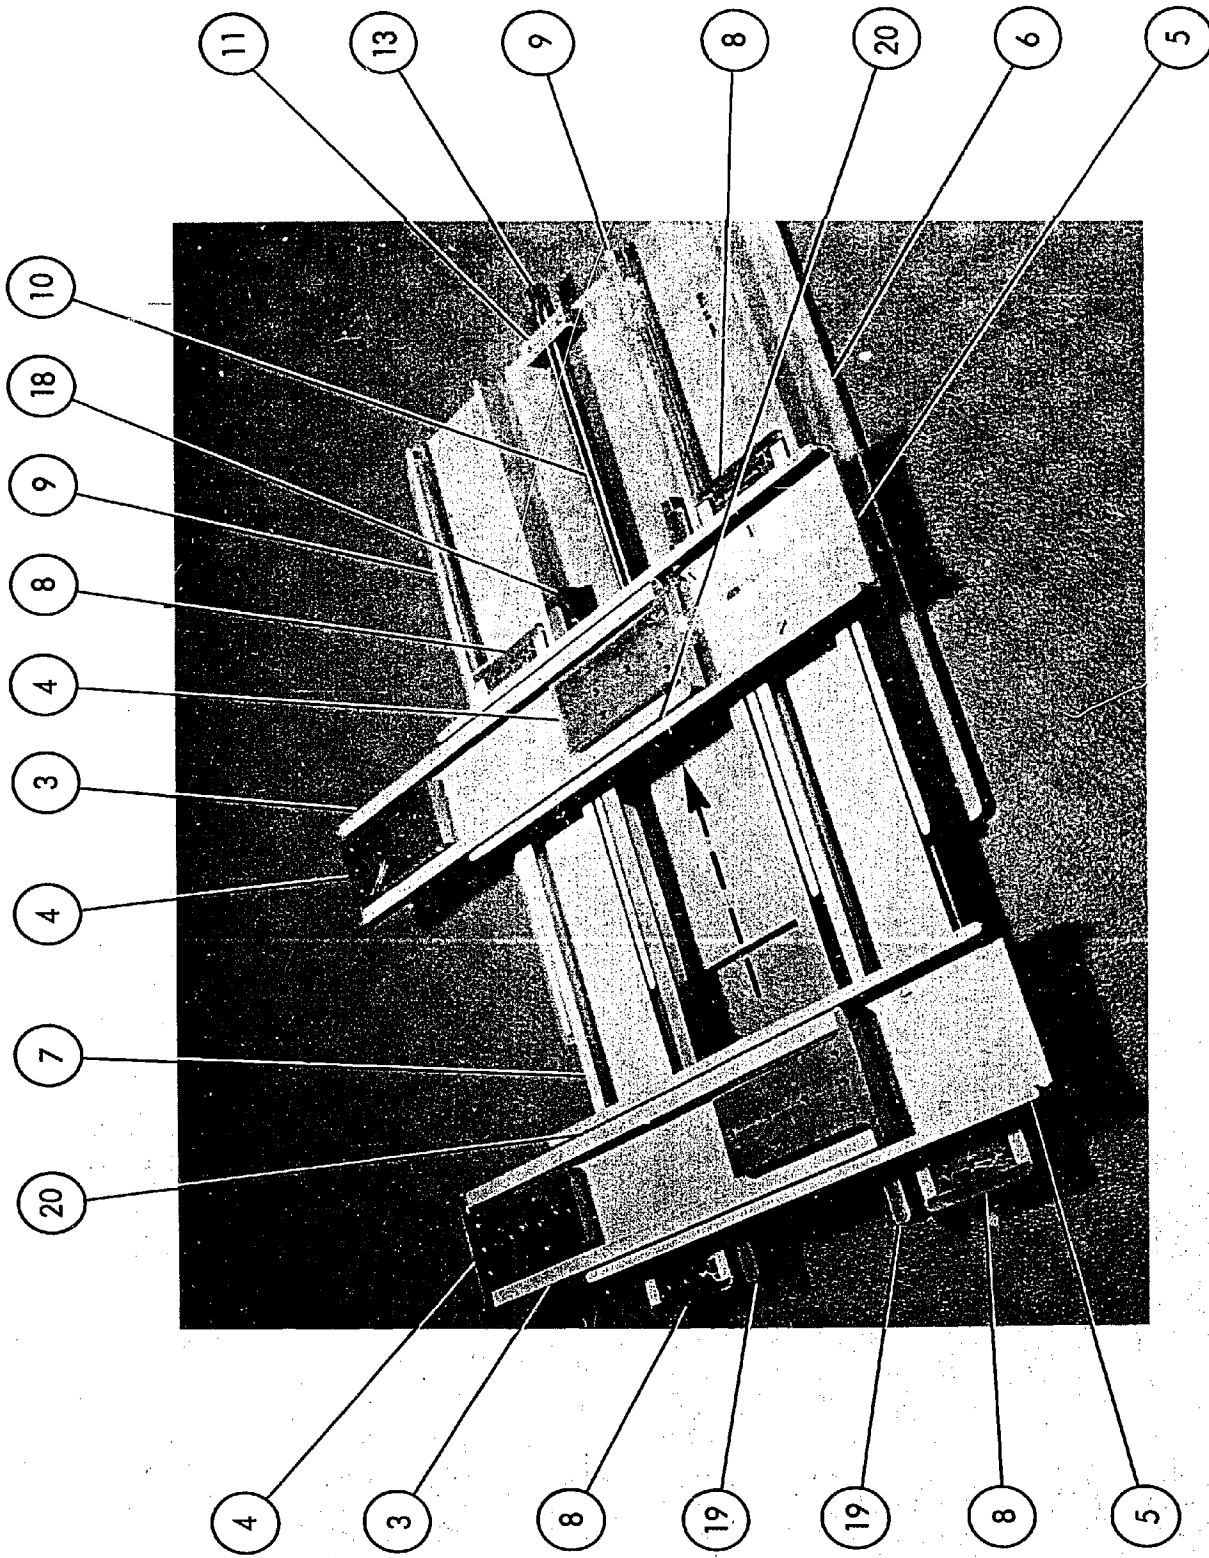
X-Y Platform lying on its working surface. The base plate has been removed to reveal details of drawer slide construction.
